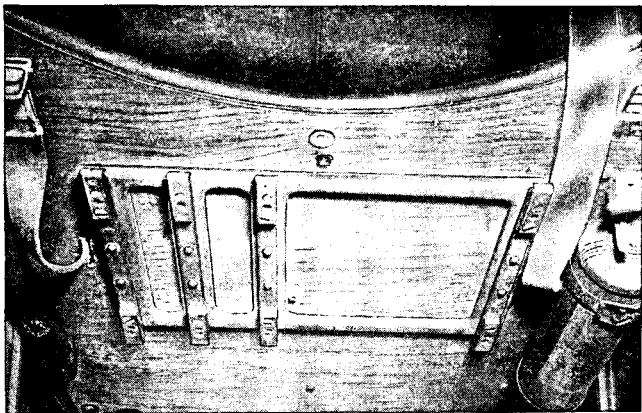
Installation of SCR-619 mounting frame on rear deck of L-4 aircraft.
